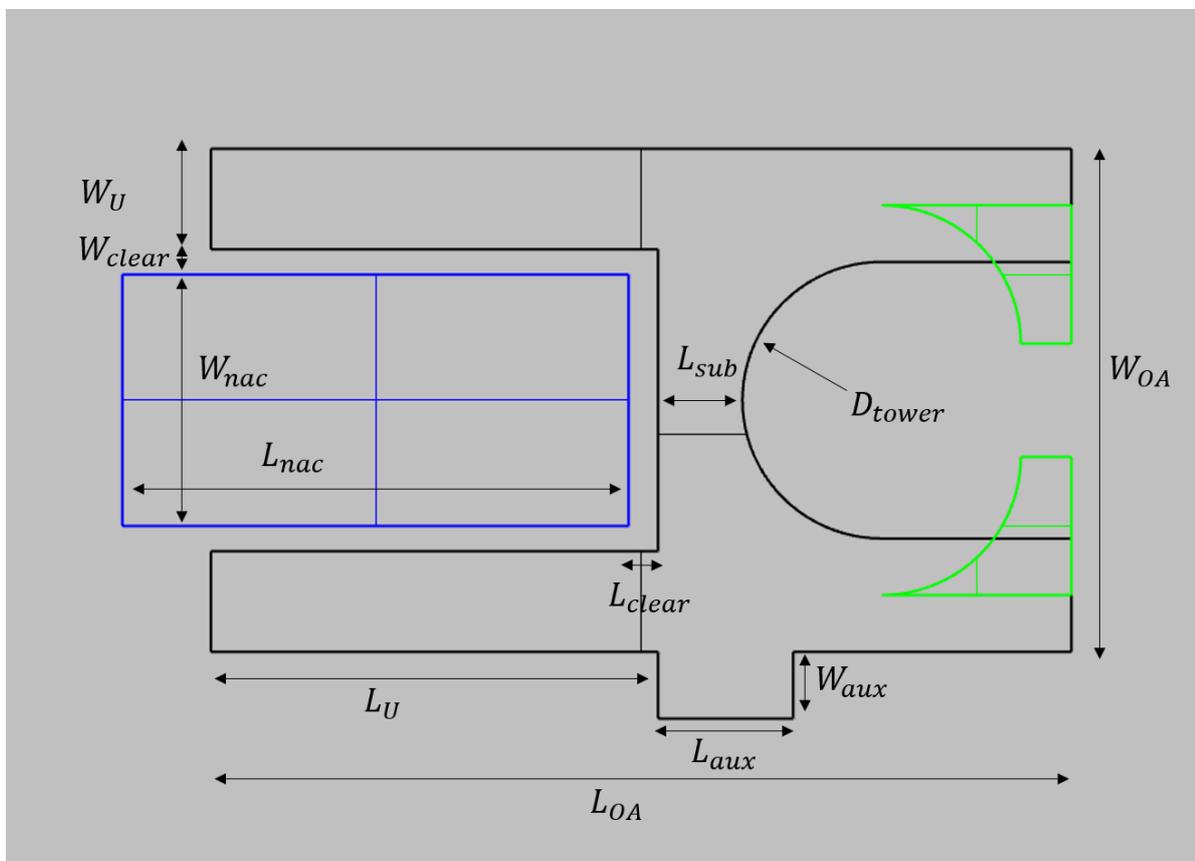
Top view of upper platform of the elevator with parameterized dimensions.
